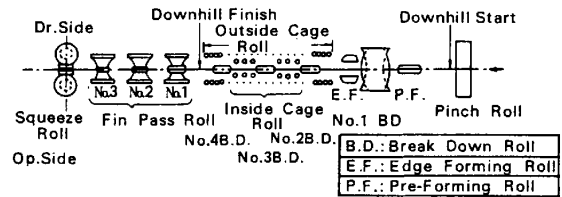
Layout of 26 inch cage forming ERW pipe mill
